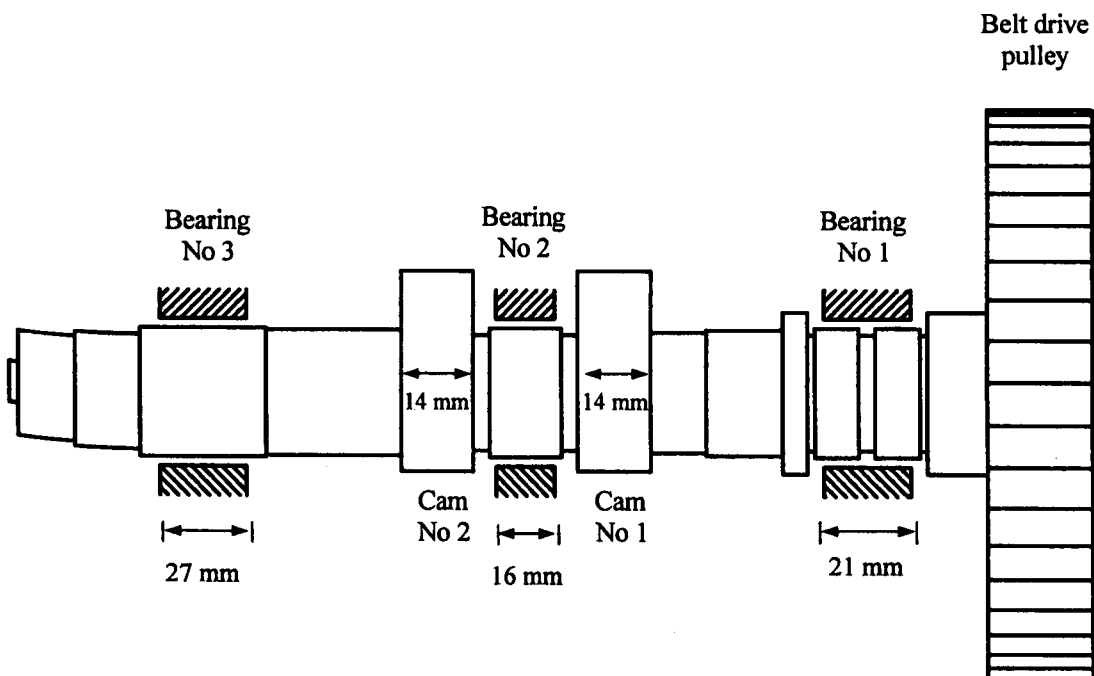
Ricardo Hydra Gasoline Engine camshaft layout
